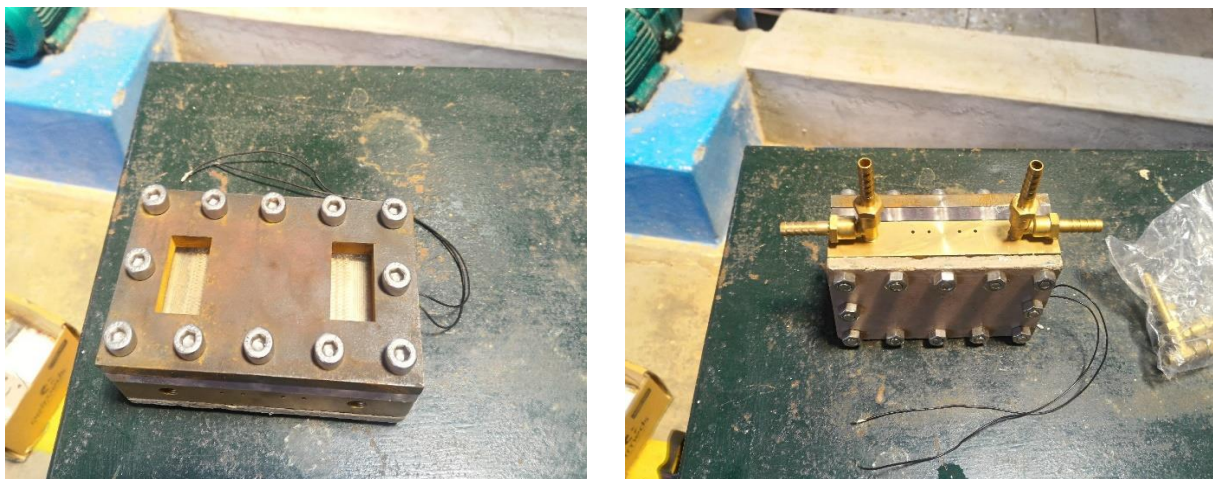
Finished Straight Microchannel Machined Brass Work Piece
